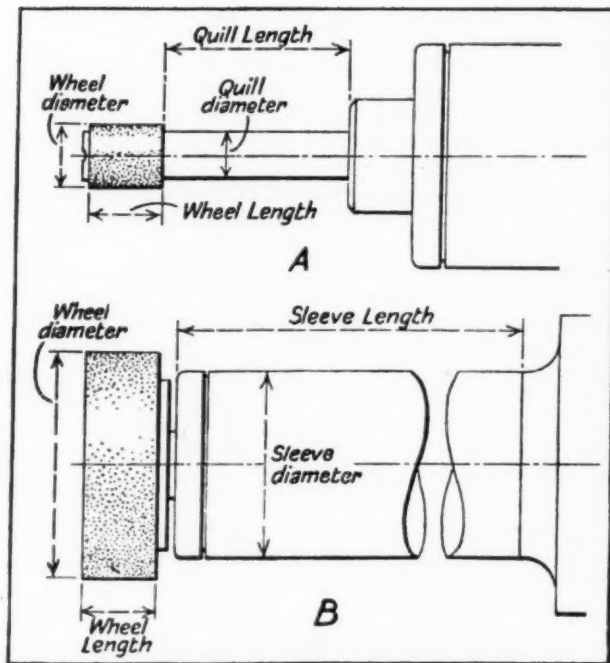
(a) QUILL-TYPE SPINDLE FOR INTERNAL GRINDING. (b) SLEEVE-TYPE SPINDLE FOR GRINDING LONG BORES OF LARGE DIAMETER
